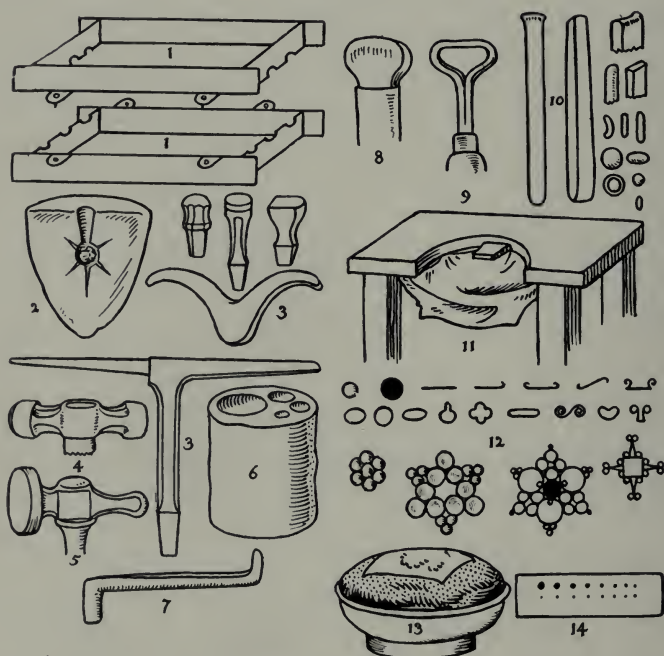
1, Casting Flasks; 2, Cuttle-Fish Bone; 3, Stakes for Raising; 4, Raising Hammer; 5, Repoussé Hammer; 6, Sinking Block; 7, Snarling-Iron; 8, 9, Burnishers; 10, Punches; 11, Jeweller's Bench; 12, Grain and Wire Units and their Application; 13, Pitch Block; 14, Wire Gauge.
